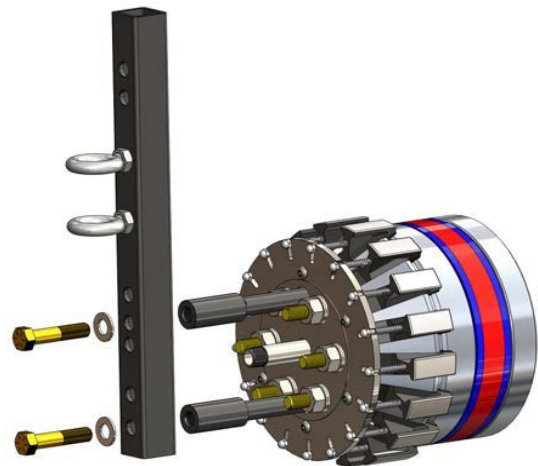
Aligning and fastening Telescoping Lifting Attachment on to Lifting Stand
